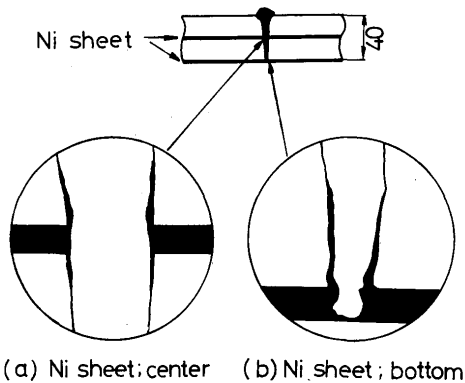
Macro-sketch of weld bead section at different position of Ni sheet inserted.
